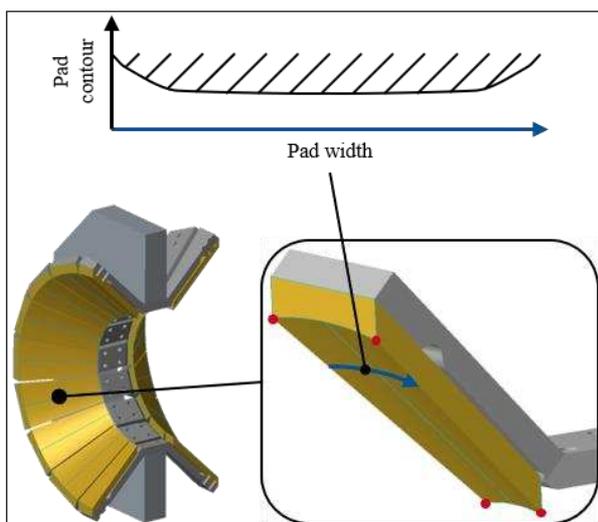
CAD model of FlexPad demonstrator (bottom left). Detail of double flexible pad mount with attached sliding pad (bottom right). Possible pad contour (top).
